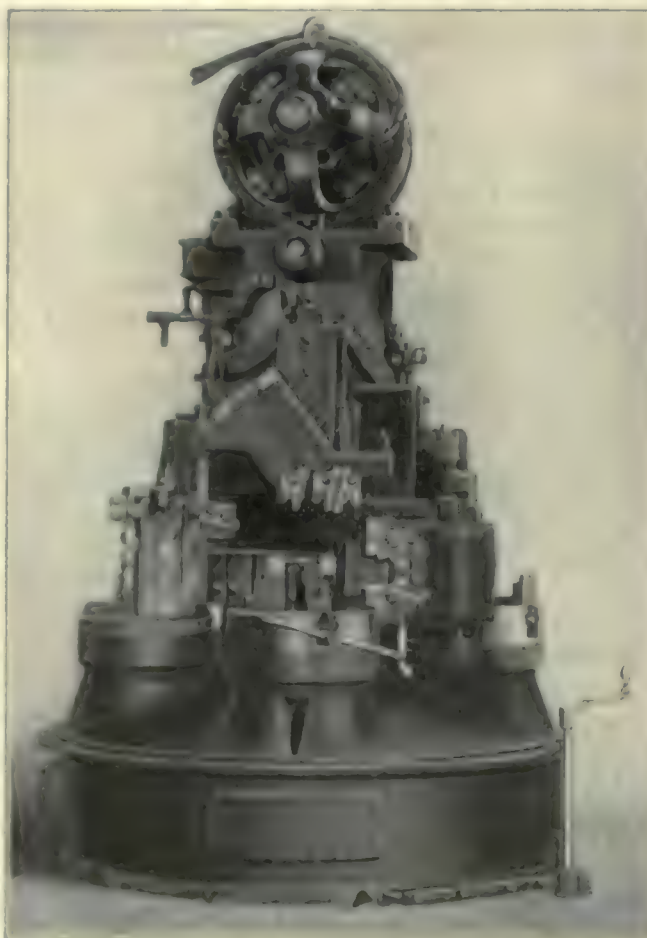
BULLARD CONTINUOUS TURNING MACHINE
